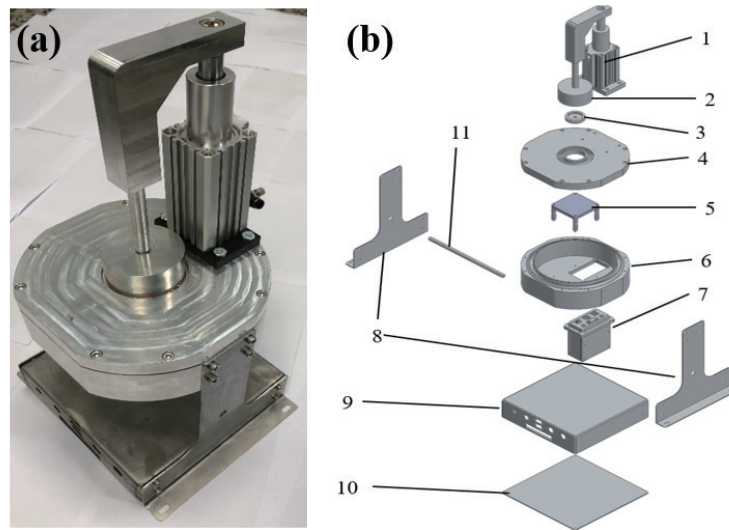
(Color online) (a) Photograph of the enclosure and (b) enlarged view of the main components of the enclosure.
